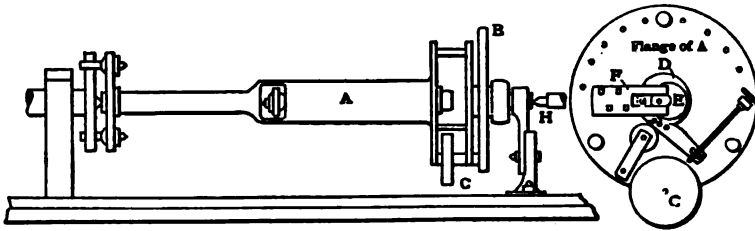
Grinding Fixture for Gas Engine Cylinders.
